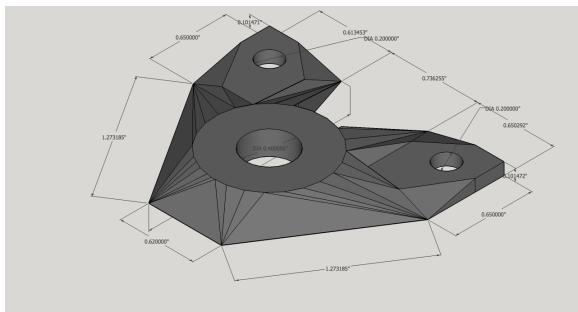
The mounting device for the photodiode with all measurements and outlays specified on page 12
